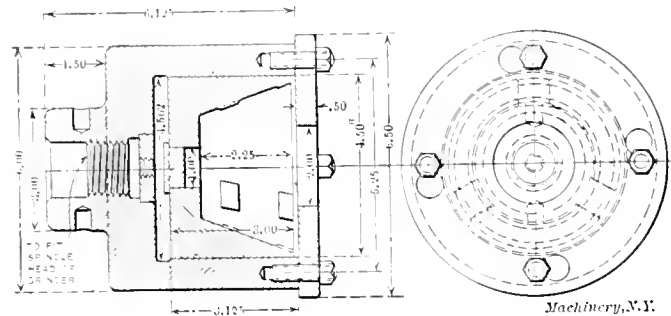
Detail of the Chuck used for Holding Bevel Gears when Grinding them, as illustrated in Fig. 15
